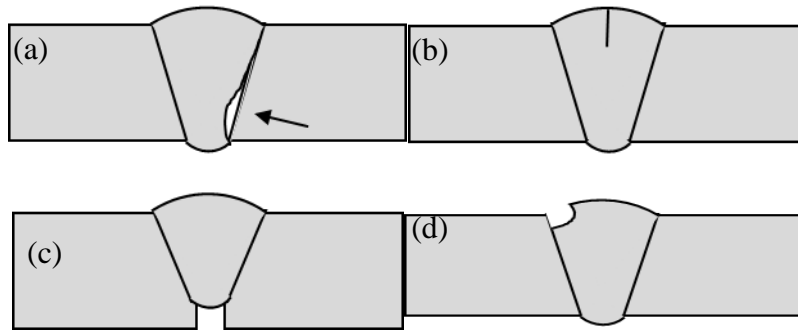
Welding defects (a) Lack of fusion; (b) Cracks; (c) Undercut; (d) Lack of penetration.
